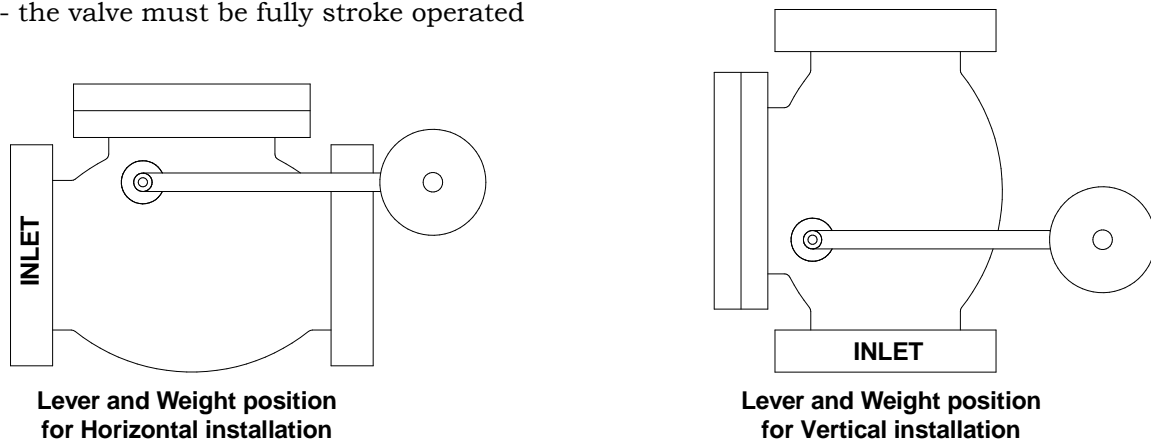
APOLLO® IRON SWING CHECK VALVE WITH LEVER AND WEIGHT
